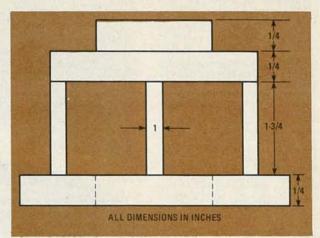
SIDE VIEW of even-numbered partition mounted atop odd-numbered partition using partition mounting strips. Each strip is located as shown in Fig. 10 and measures 1 \times 1 \times 1% inches.
